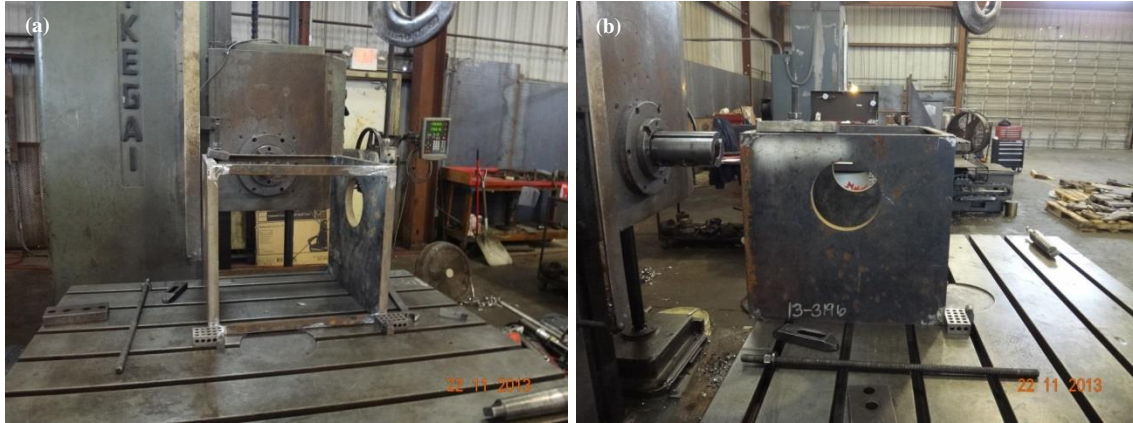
The upper plenum assembly at the fabrication shop: (a) The front view of the upper plenum, (b) The side view of the upper plenum.
